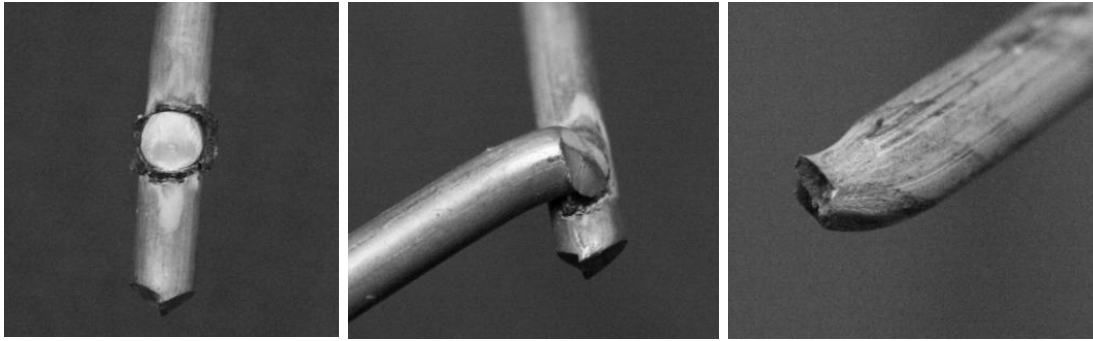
Welded wire mesh failure mechanisms: L-R weld failure, failure through heat affected zone (HAZ) and tensile wire failure. (From Morton 2009)
